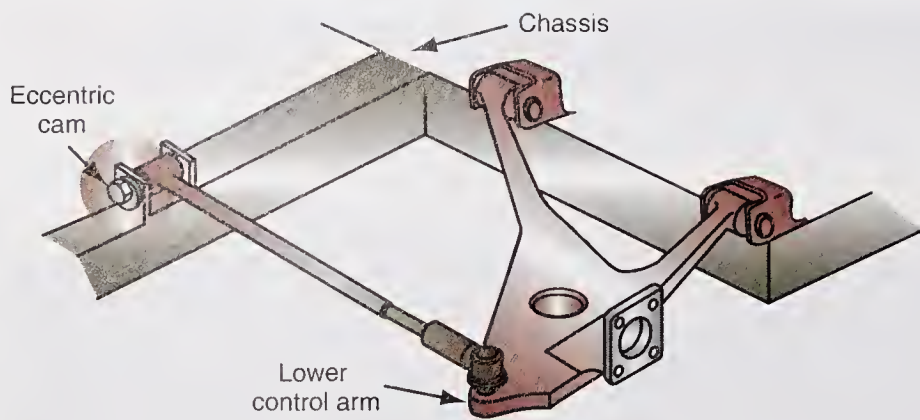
Cam bolt for rear wheel toe adjustment.
